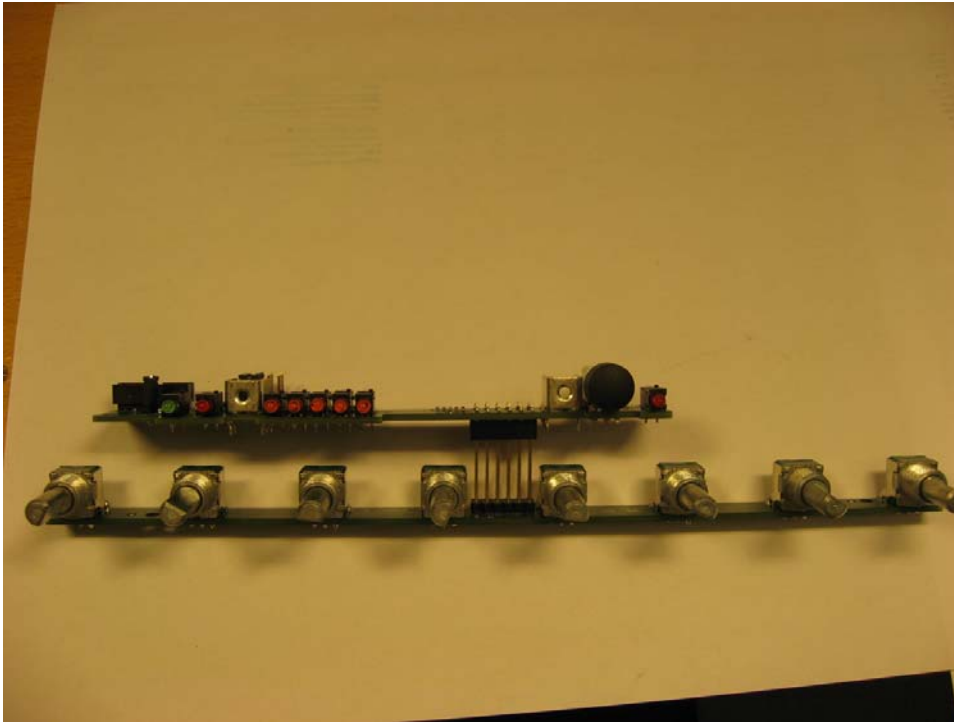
Mount Front PCBs together using the connector as shown in the picture.
